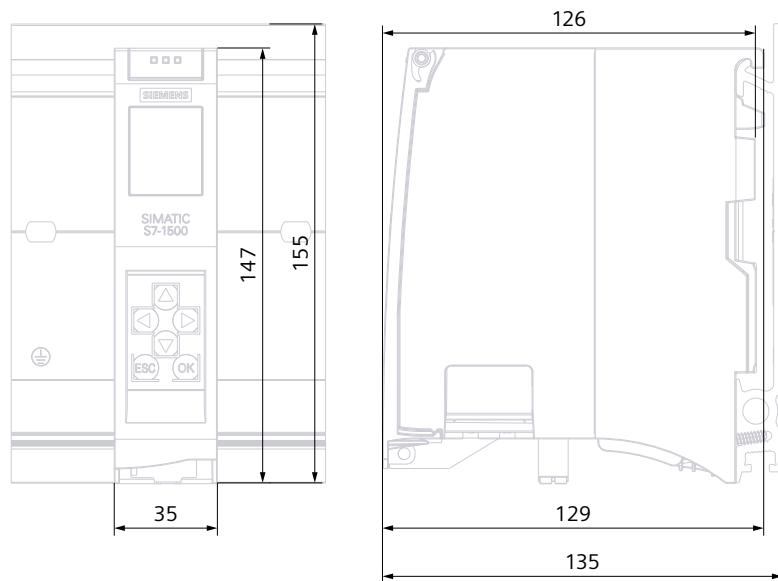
Dimensional drawing of CPU 1511-1 PN, front and side views
